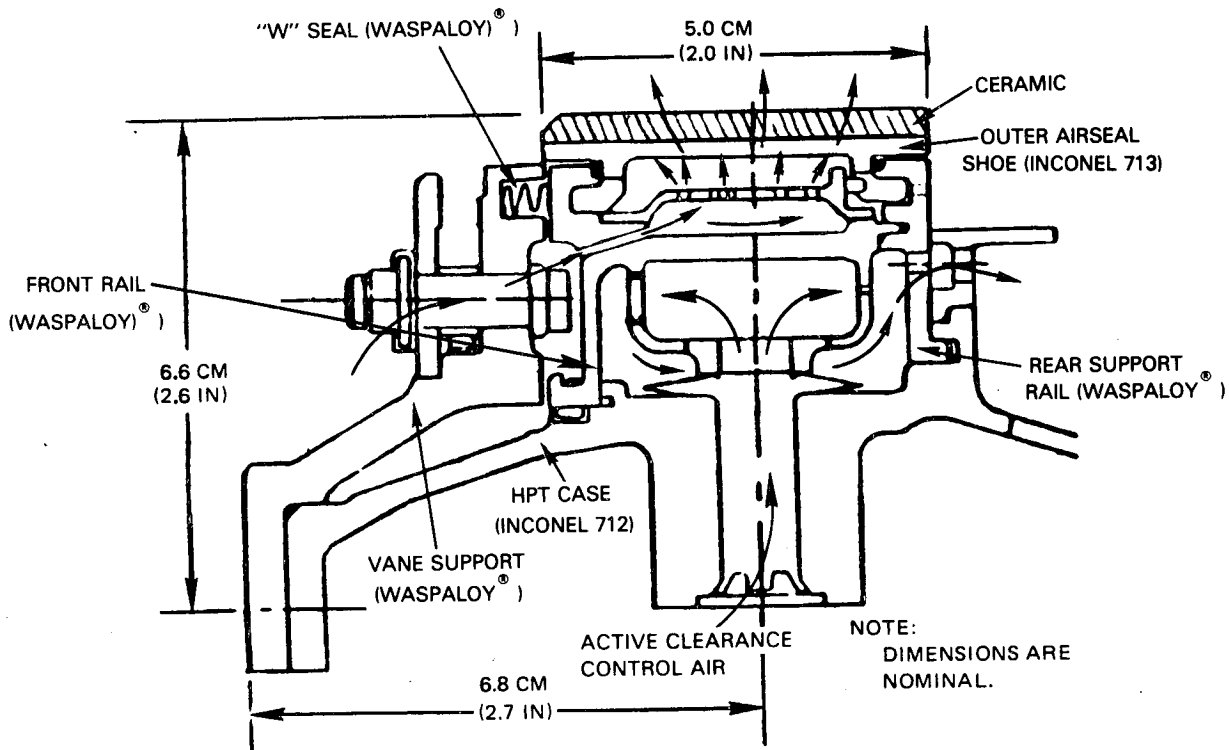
Turbine Blade Tip Seal Assembly
